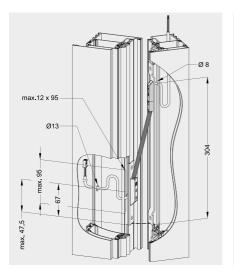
Routing dimensions for STV-KÜ-T1 FT and cover plate F16 or F20 (dimensions in mm)
